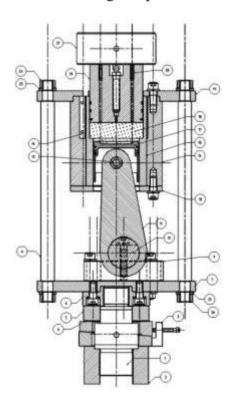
Virtual assembly drawing of the device for fatigue and compression tests for gasoline engine pistons *Source: Self Made
